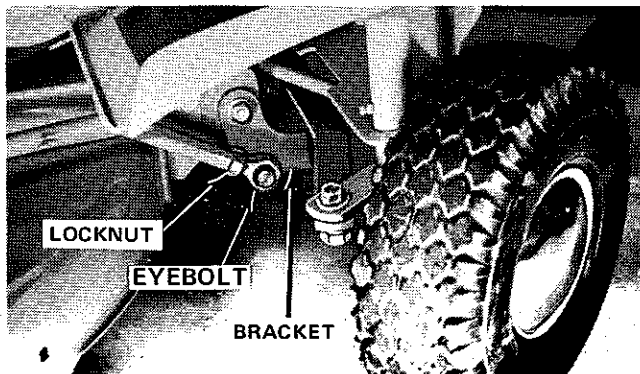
Mower Front-To-Rear Pitch Adjustment
